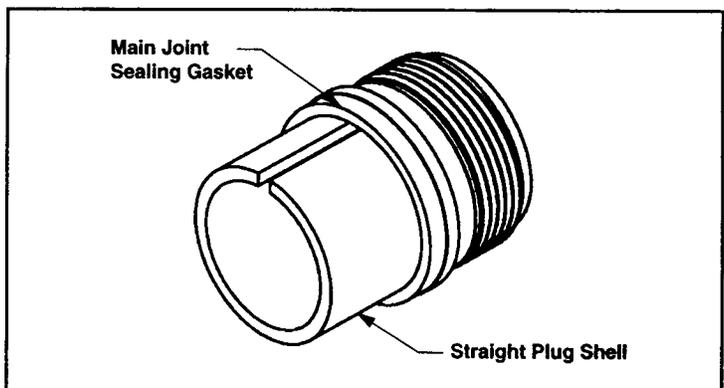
Figure V: Straight Plug Assembled with Main Joint Sealing Gasket
